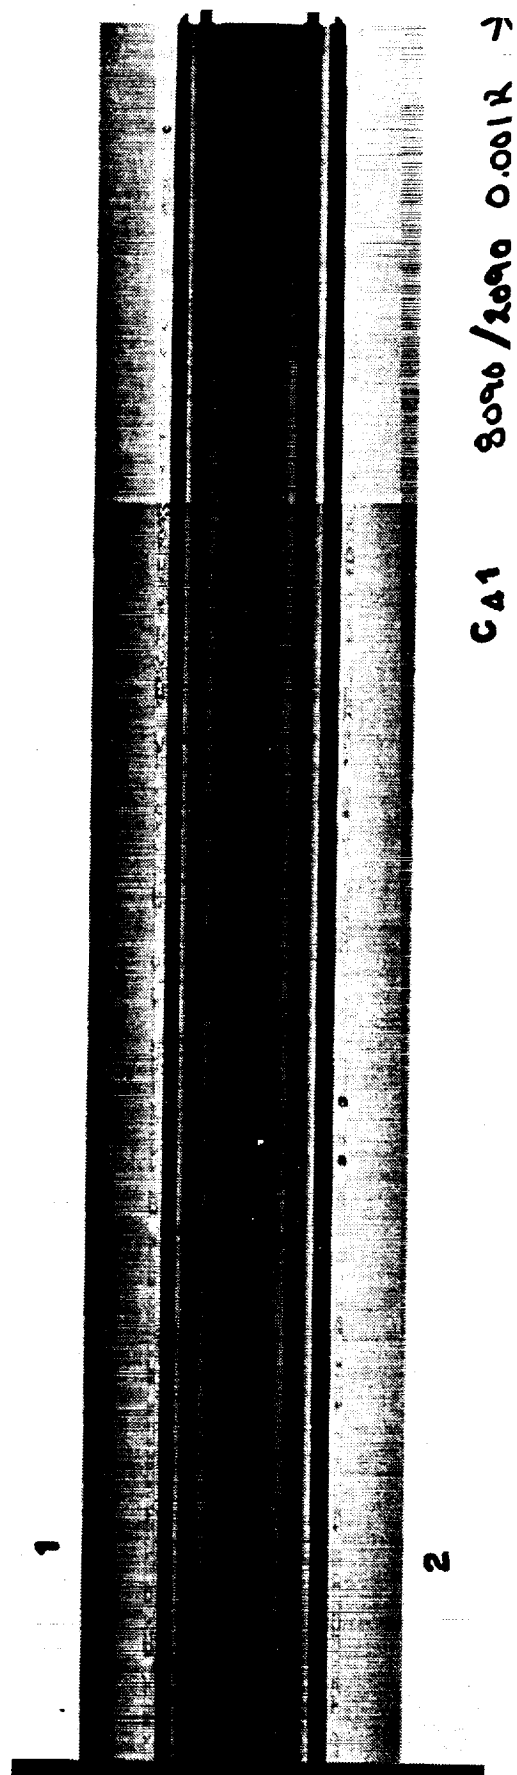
Contact Print of Radiograph Showing Porosity in 8090-T6 to 2090-T83 Welds on Prototype Parts That were Chemically Milled 0.001 in. (0.02 mm) Prior to Welding.
